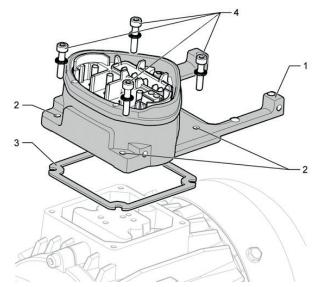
Assembly sequence: Terminal box – adapter plate (VAU 4/4 & VAU 7.5/3)
